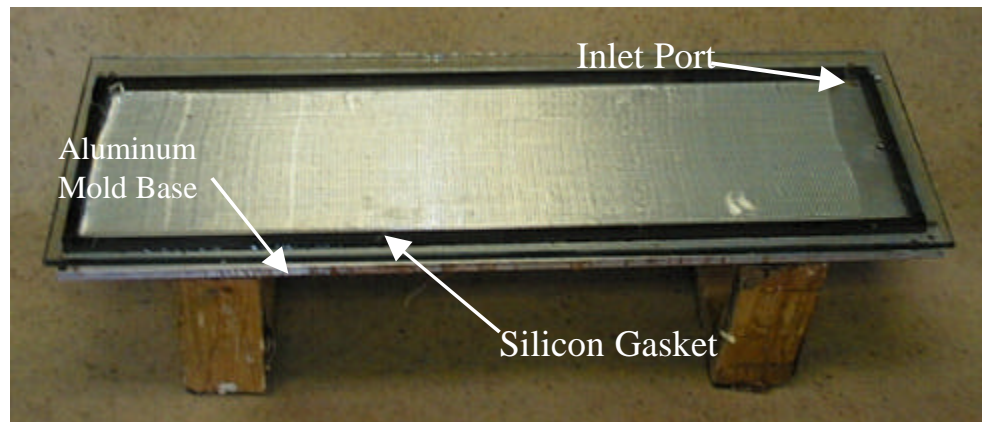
Flat Plate RTM Mold for DCB and ENF Specimens
